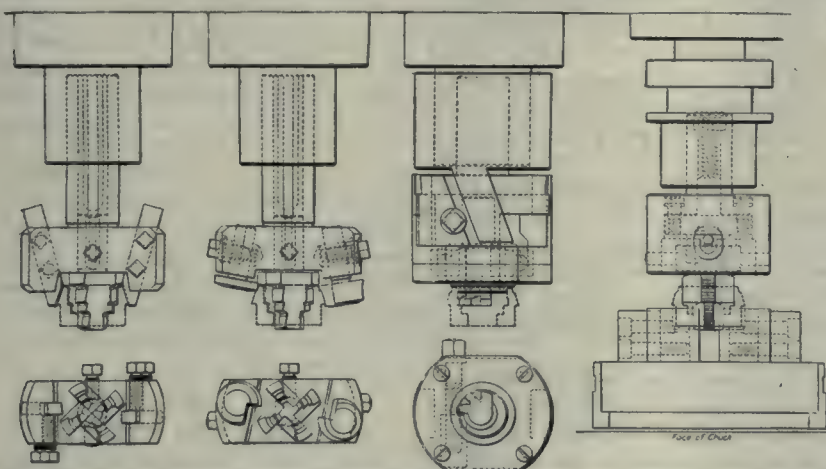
TOOL LAYOUT FOR MACHINING 18-POUNDER H.E. SHELL HEAD—FIRST OPERATION.
